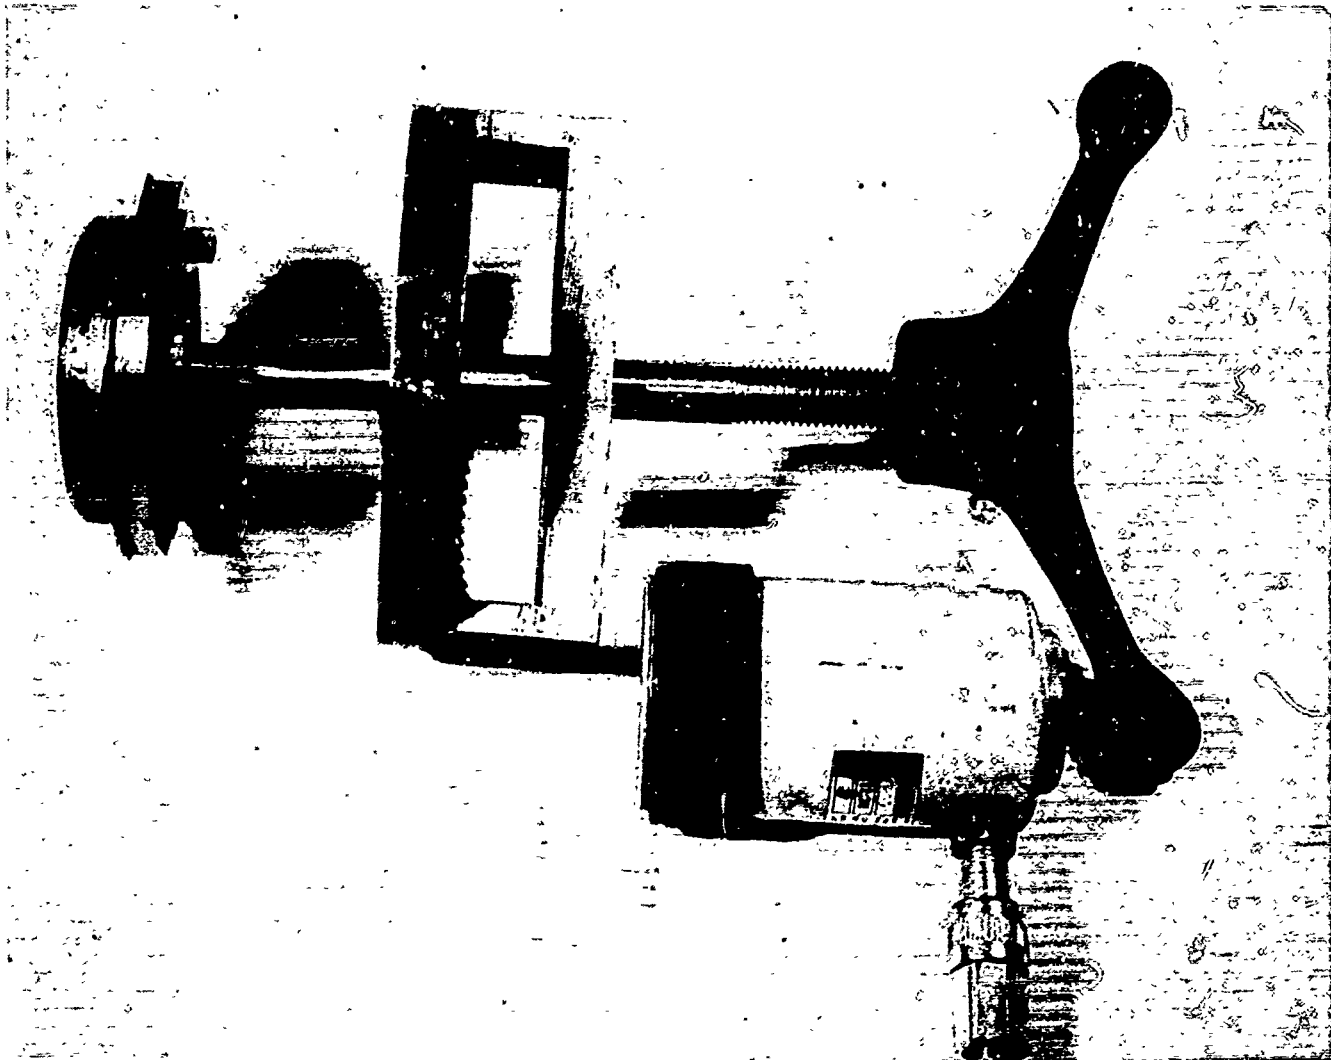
ROLLER BEARING OUTER RACE PULLER
